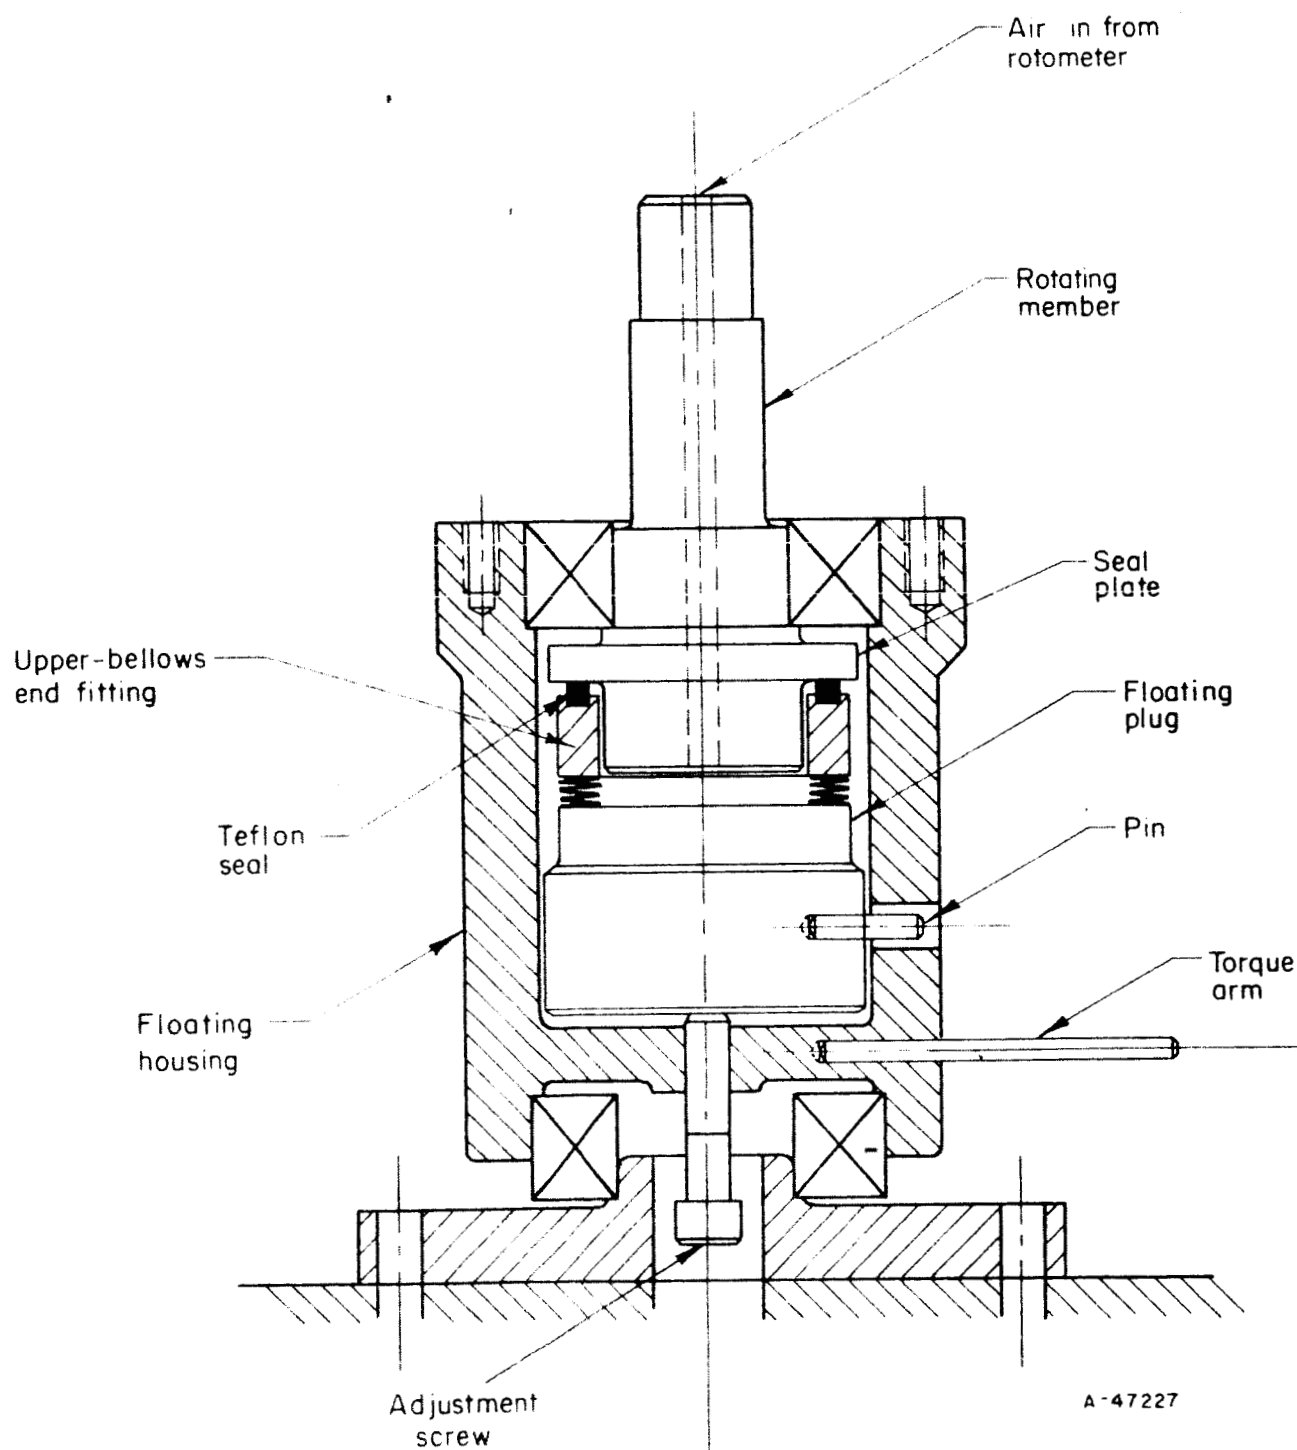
SINGLE-SEAL TEST FIXTURE
